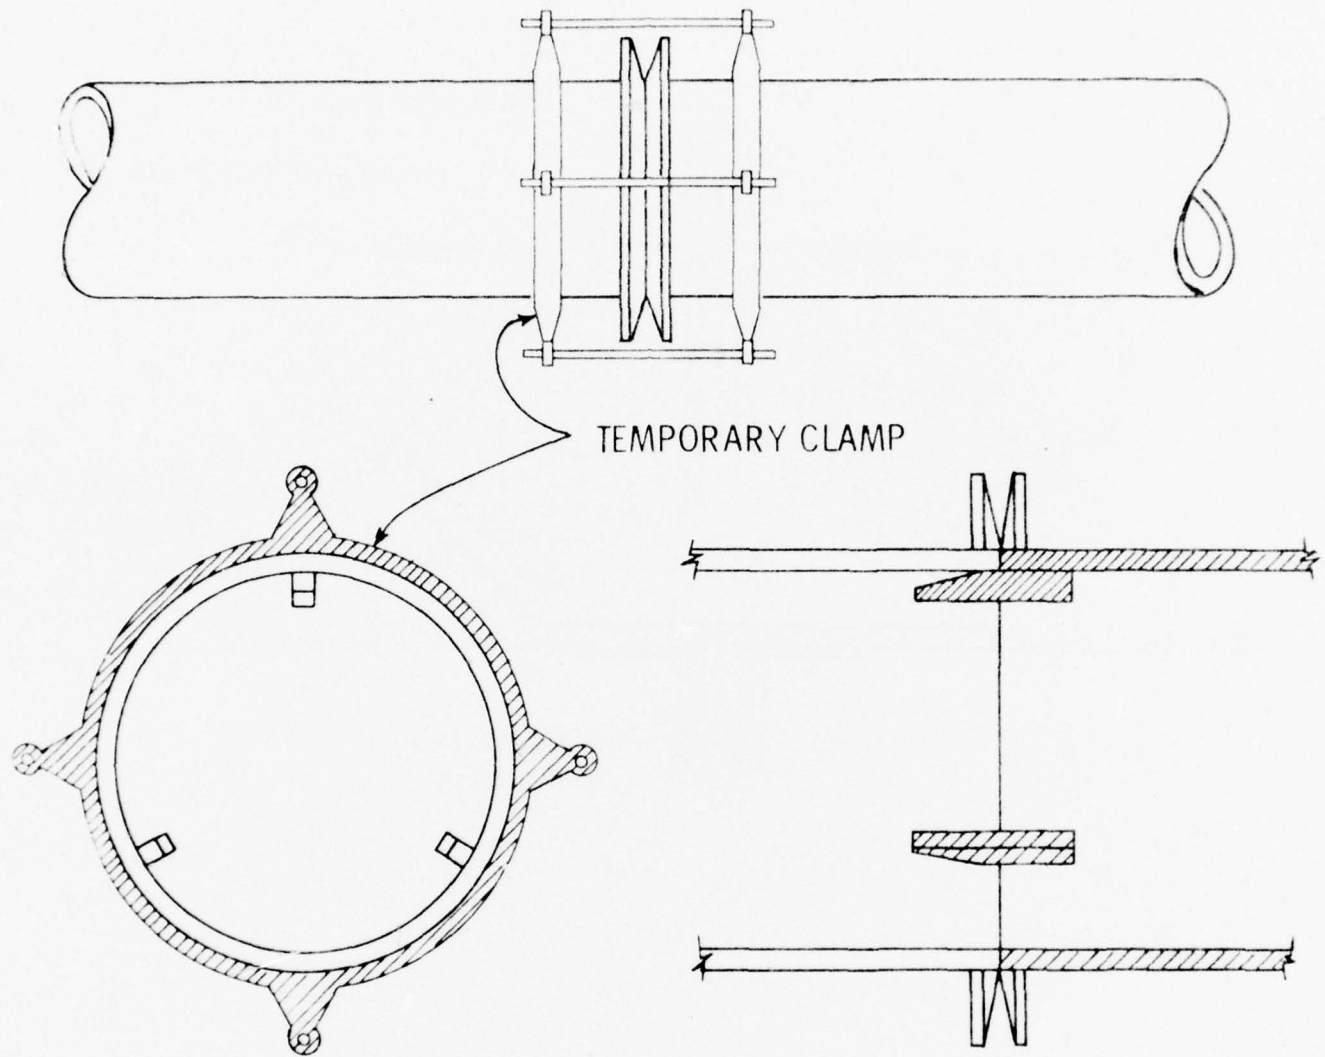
Symmetrical Pipe Flange Joint Test Specimen
